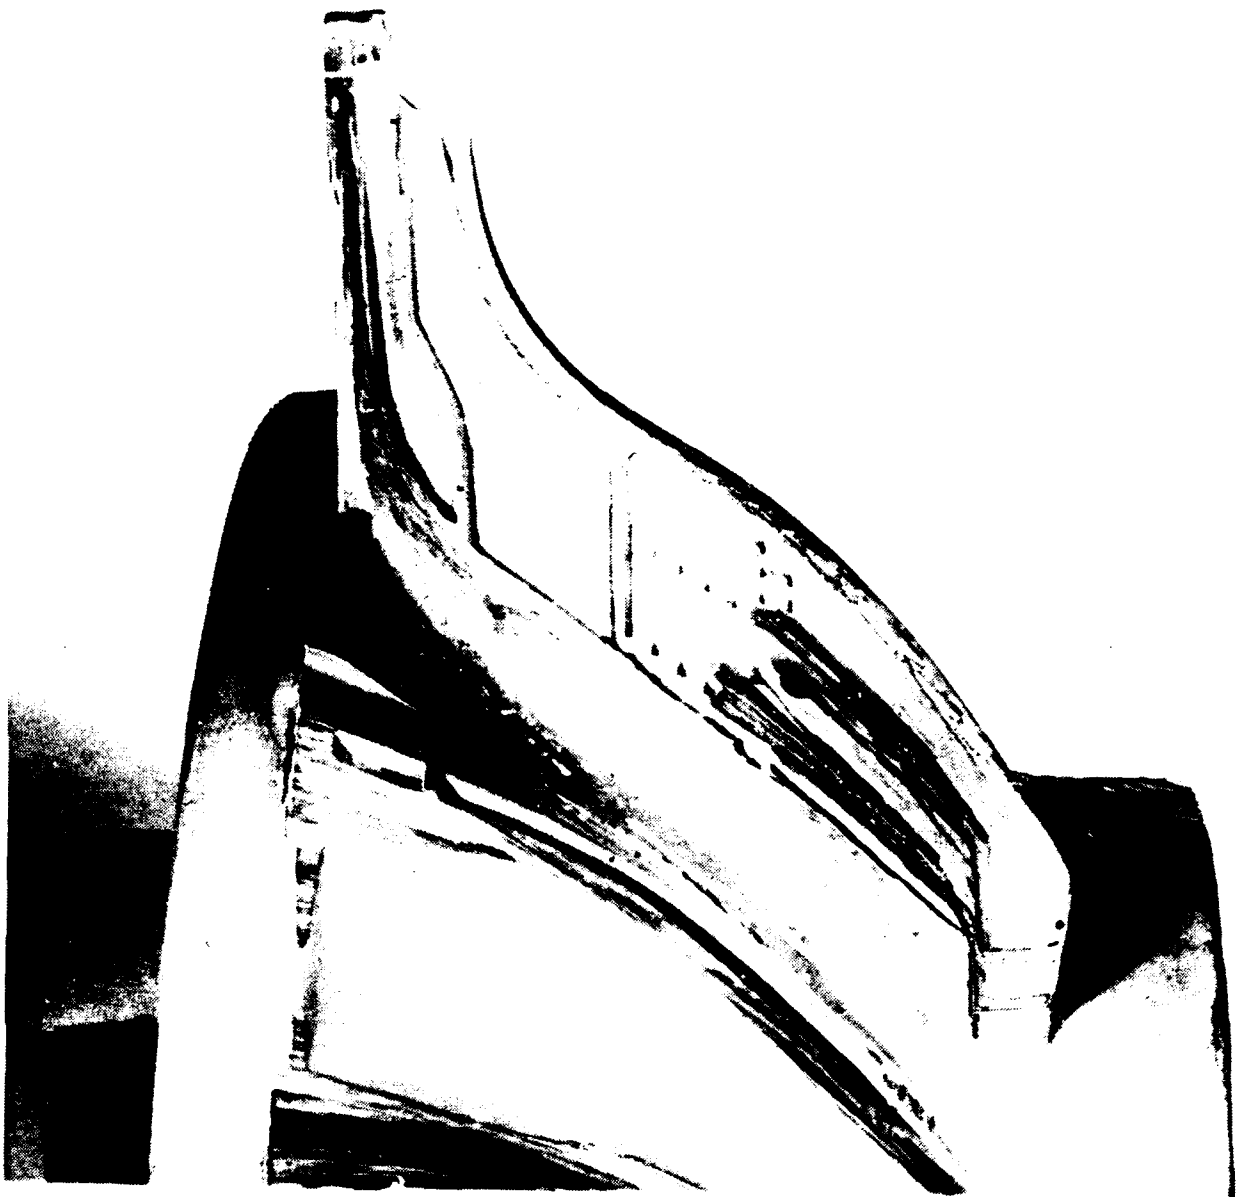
SECTIONED CASTING, PRESSURE SIDE
